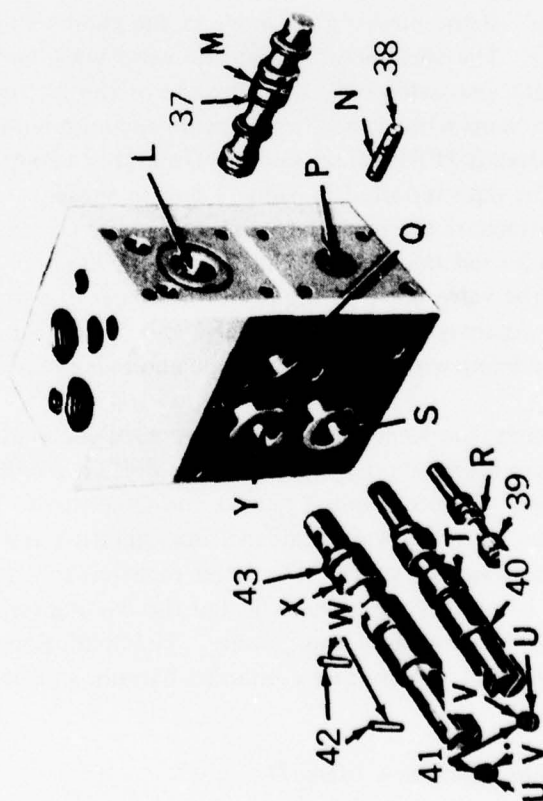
Sticking Valves on M60A1(AOS) tank valve assembly-hydraulic.
